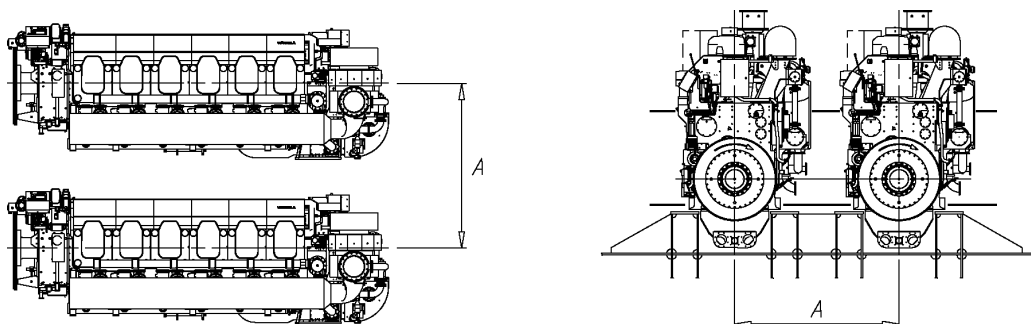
Crankshaft distances, in-line engines (3V69C0320b)
